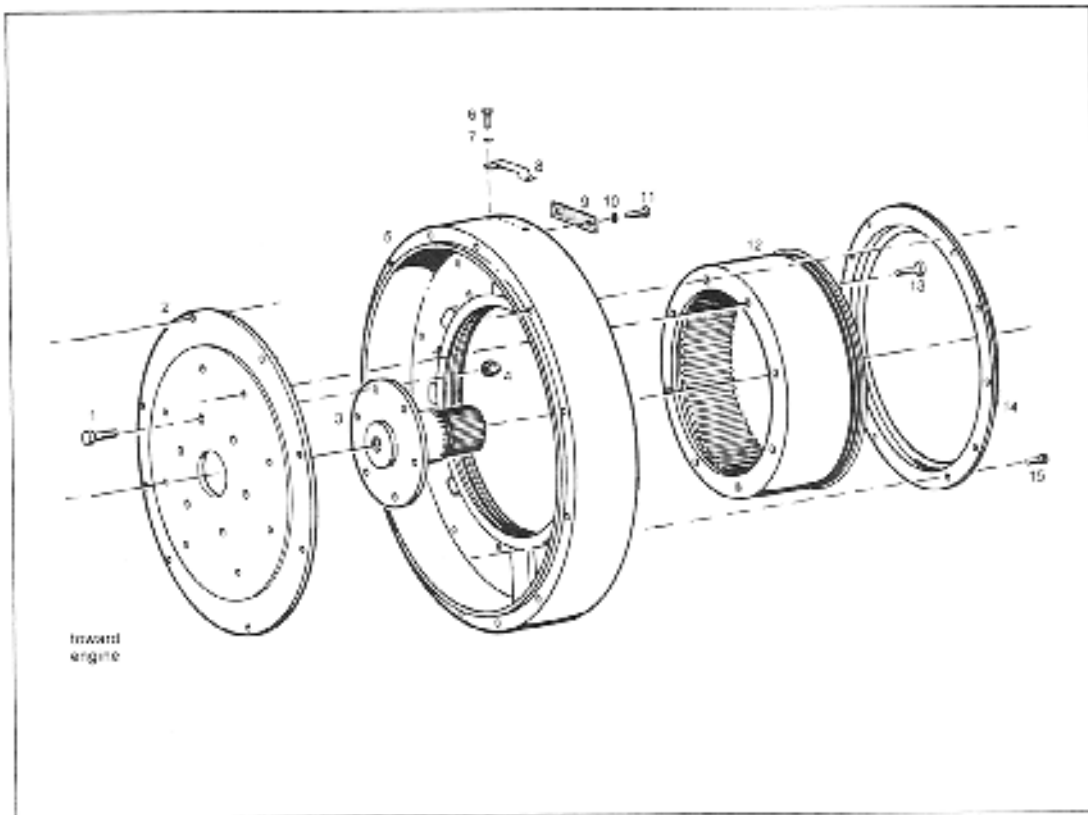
HP-9400 and HP-10500 Adapter Parts
